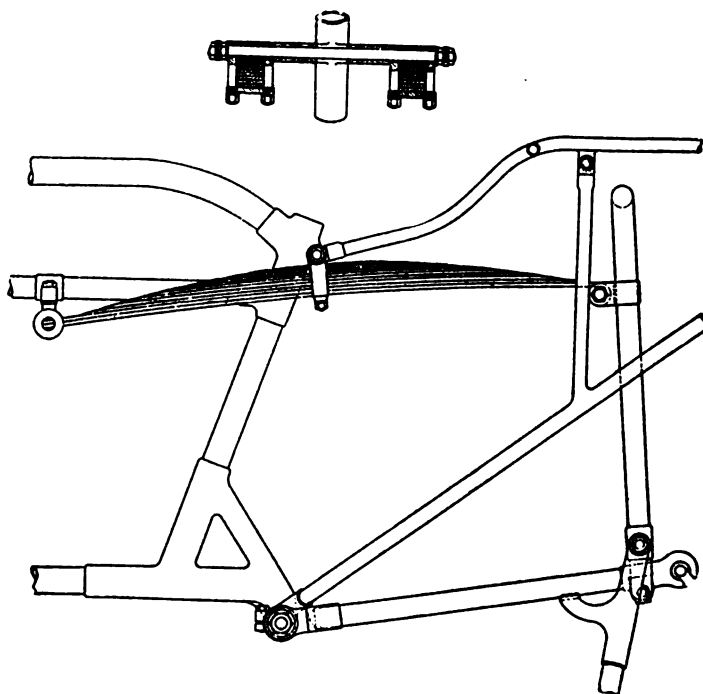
Springing 2¾ hp. model with laminated rear springs
